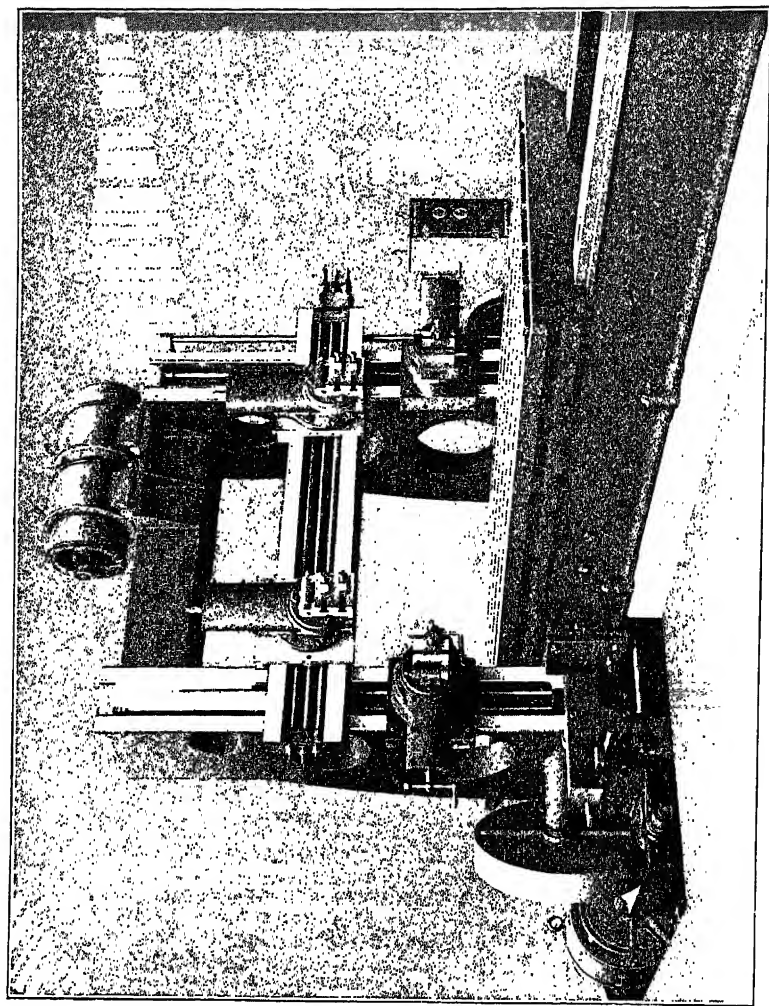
Armour plate planing machine, by J. Buckton & Co., Ltd., Leeds; driven by motor-generator set and 90 H.P. direct current motor with automatic push-button operated contactor control.
